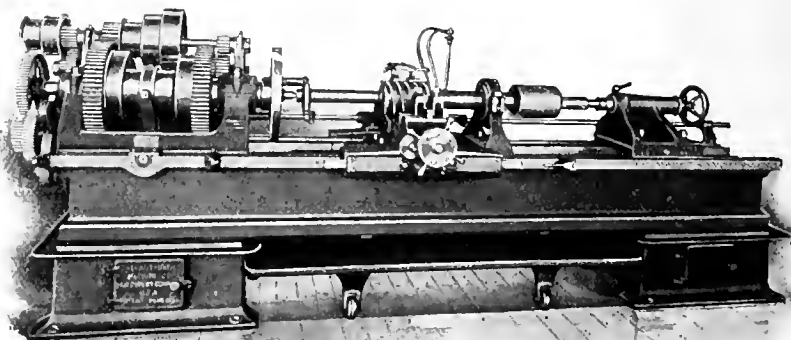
Automatic Threading Lathe for Worms, made by The Automatic Machine Co.
